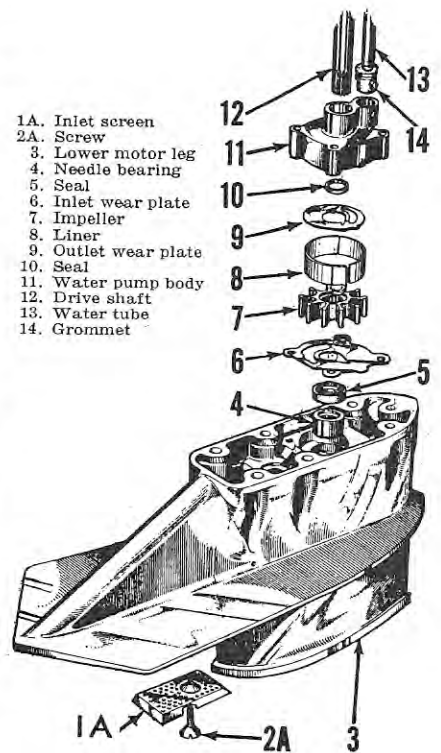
Exploded view of lower motor leg showing water pump and associated parts.
